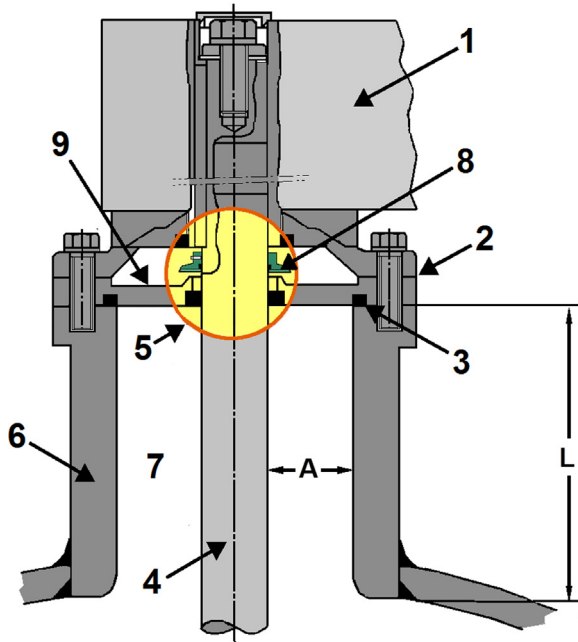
The top entering agitator with motor (1) is mounted to a vessel using a flanged or hygienic clamp connection (2), with hygienic O-rings or gaskets (3) to seal between the mating surfaces. A retained gasket having limited compression is more hygienic than an O-ring in the face for sealing the joint. The agitator shaft (4) passes through the mounting flange via a seal (5). The upstand (6) for the top mounting of the agitator should have limited length L because of the difficulty of cleaning the annular space (7) in-place. The annular space between the agitator shaft (4) and agitator nozzle (6) shall, for cleaning purposes, have the target maximum L/A ratio of 2:1. Agitator motors (1) should be equipped with permanently lubricated bearings. Where lubrication is required, the design and construction shall be such that lubrication cannot leak, drip, or be forced into the product zone. Self-lubricating agitator shaft (packing) seals (8) shall be provided with convenient means for adjustment to prevent leakage and to allow for complete drainage to the exterior. In that way, accumulations of foreign material in the event that leakage does occur can be avoided. Further, a drip protection plate (9) can be provided to prevent lubricant from entering the product zone (Moerman and Kastelein, 2014).
